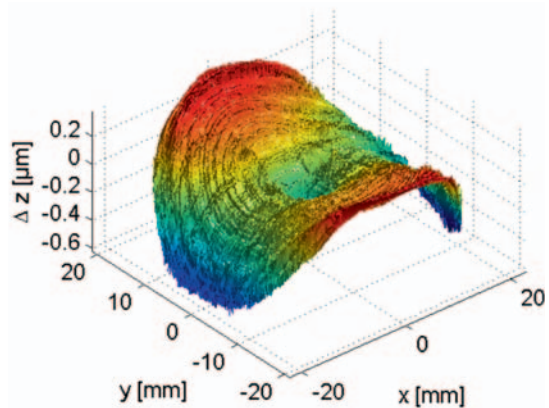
Measurement result showing fine tooling marks on the test surface.
